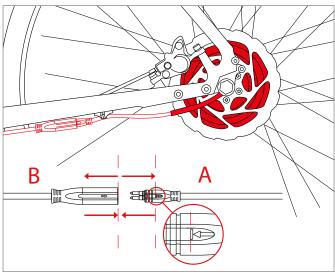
Connecting and disconnecting the motor cable – rear motor
